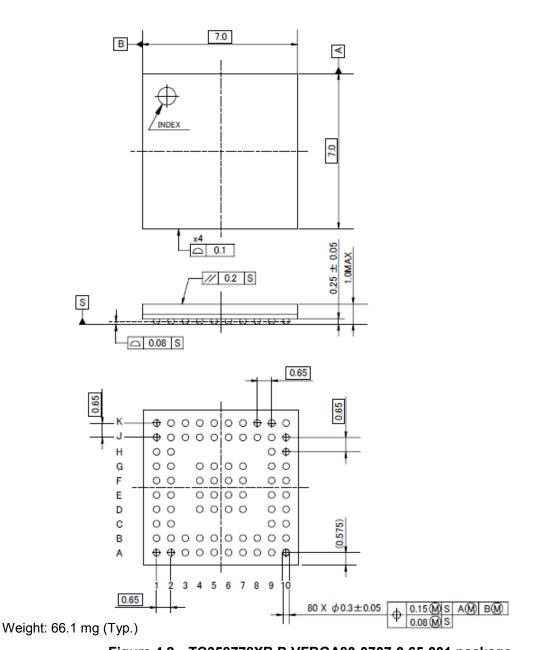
TC358778XB P-VFBGA80-0707-0.65-001 package
